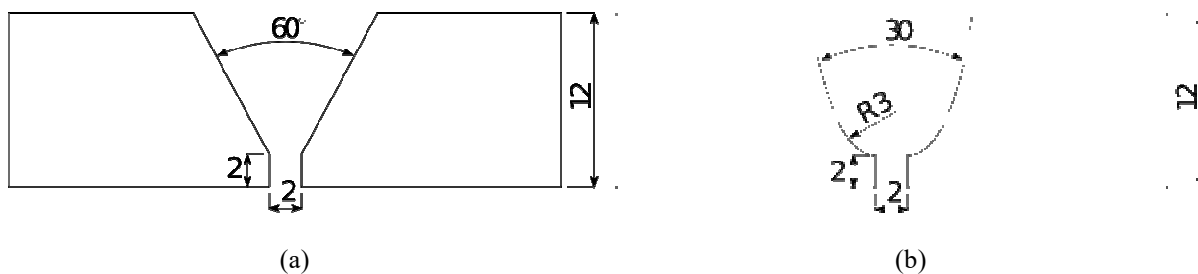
Joint designs for welds (a) V-joint, (b) U-joint, (all dimensions are in mm)
